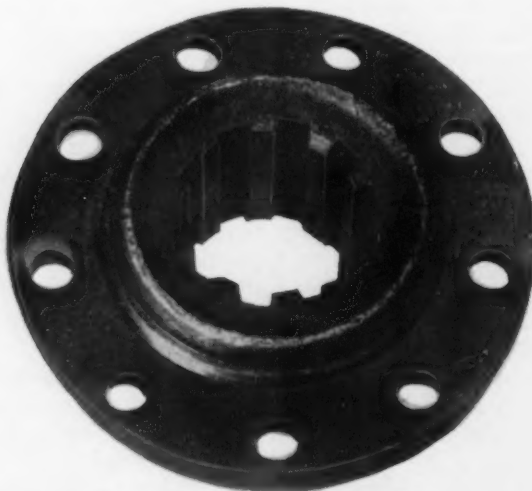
The nine holes in this automotive transmission part are punched in one stroke, but in three  $\frac{1}{16}$ -in. staggered steps to reduce press load. Hole diameter is 0.312 in., and stock thickness,  $\frac{3}{8}$  in. Runs of 100,000 pieces have been made without punch breakage or scoring.
